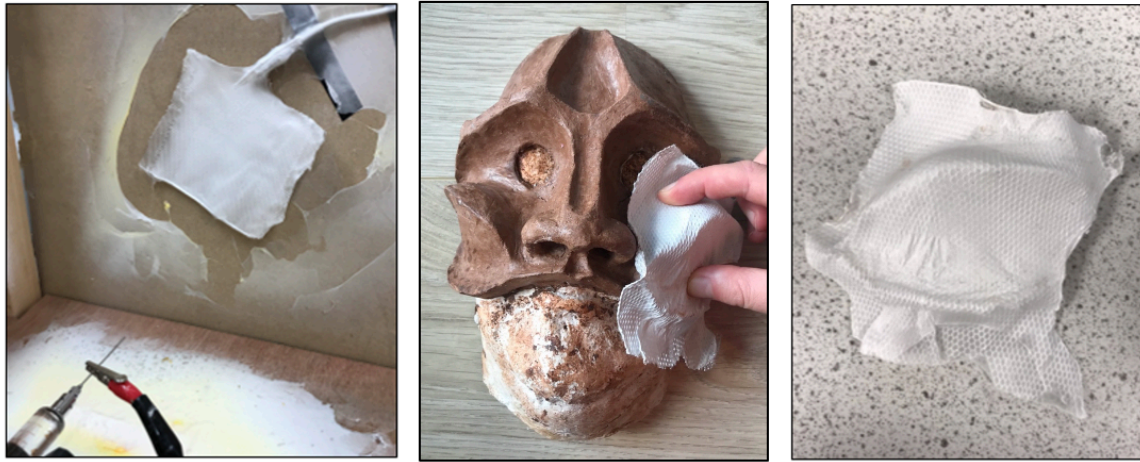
Moulding the wire mesh with the electrospun PU fabric into the shape of the cheek using the clay mask mould
